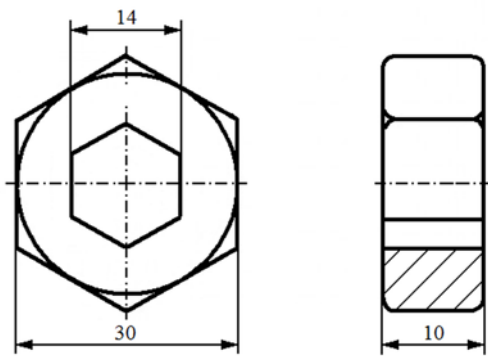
An adapter enabling nozzle nut to be unscrewed
